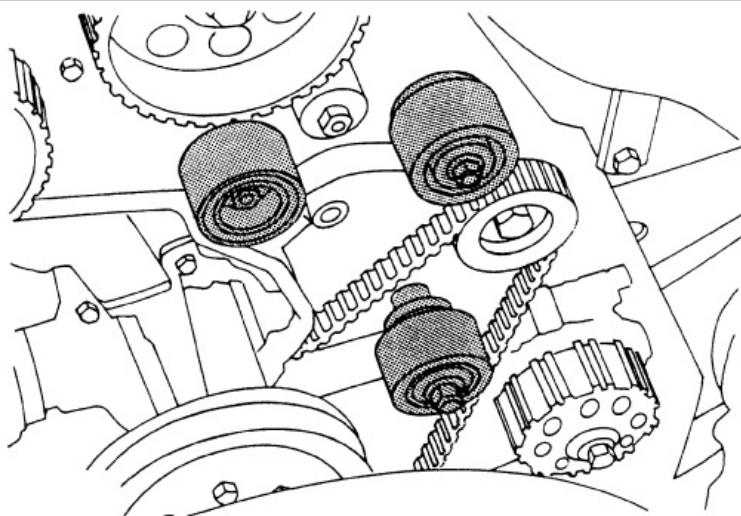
Check the timing belt idler pulleys for wear or bearing noise; replace if necessary
